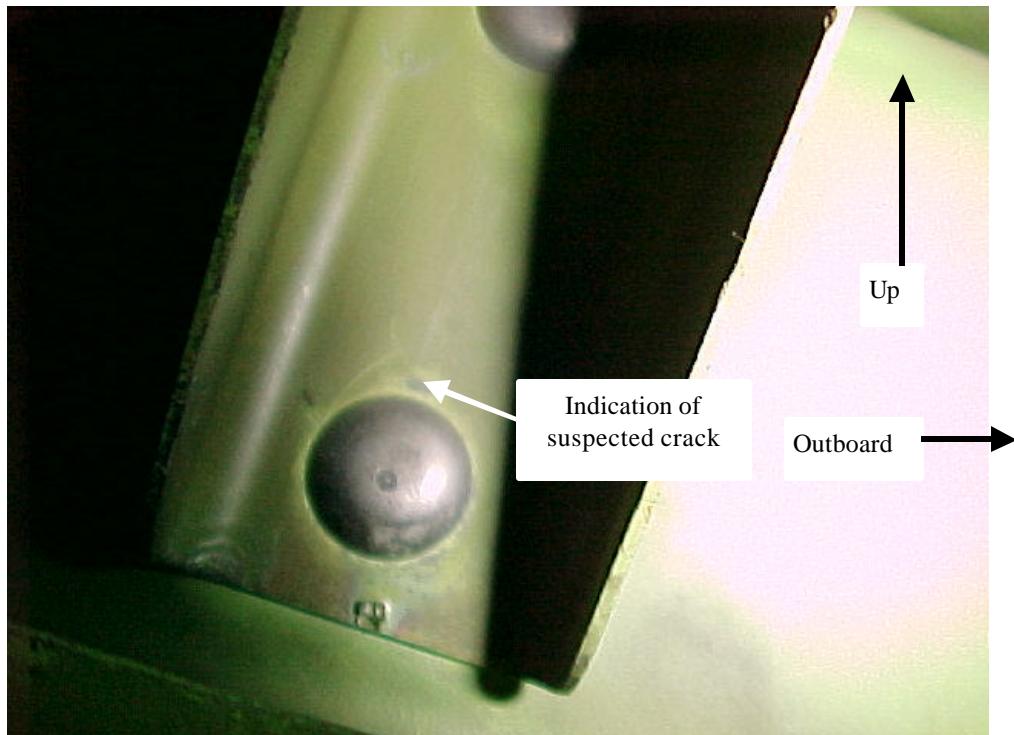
Photograph of stringer clip at FS 600, stringer 4R. Detailed visual inspection discovered an indication.
